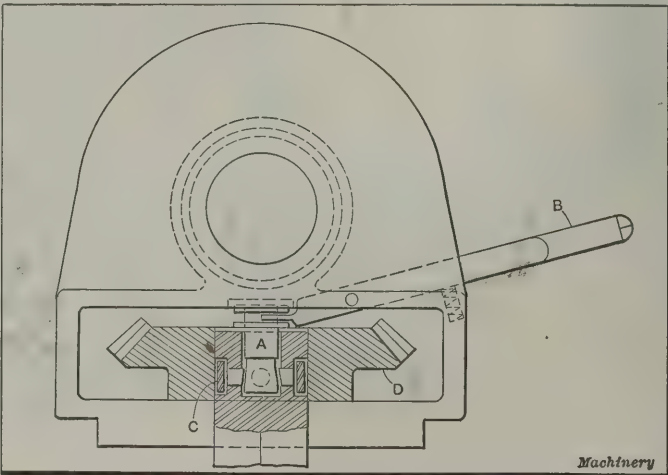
Clutch for Starting and Stopping Lathe Spindle
